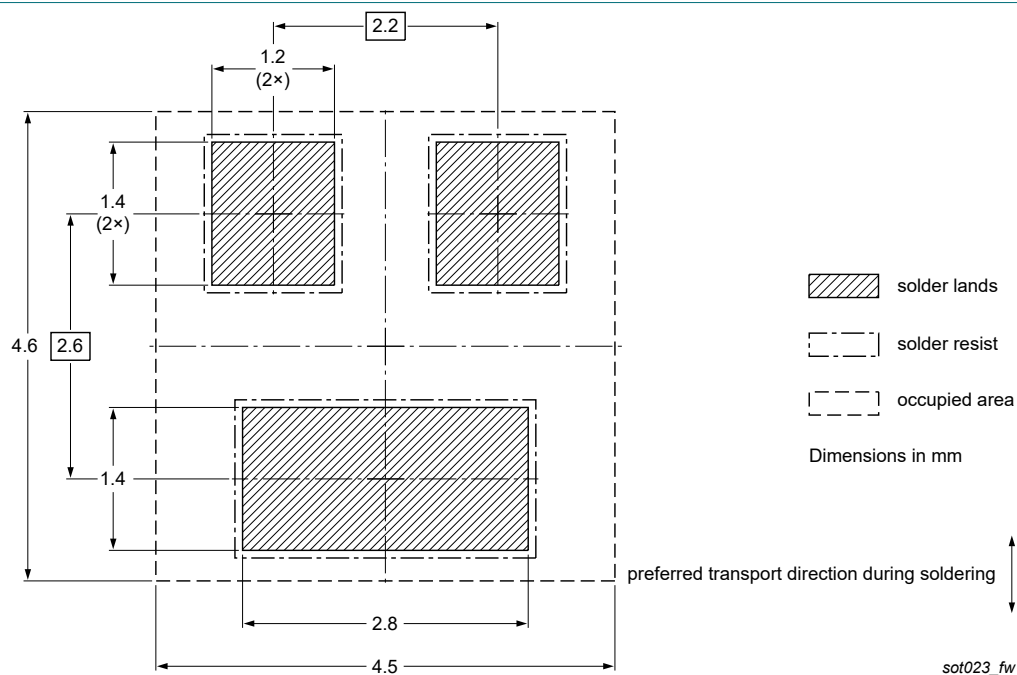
Wave soldering footprint SOT23 (TO-236AB)
